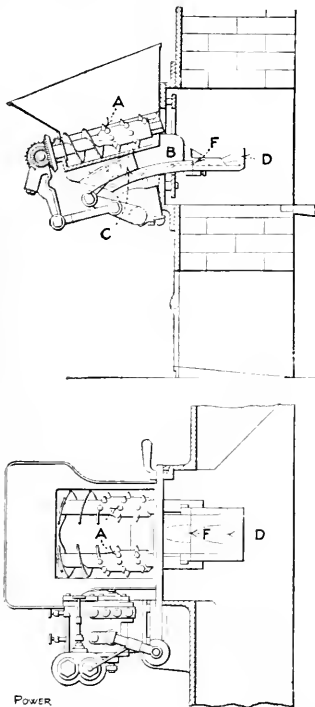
SIDE AND TOP VIEWS OF STOKER, SHOWING CRUSHING ROLLS AND SPREADING PLATE
